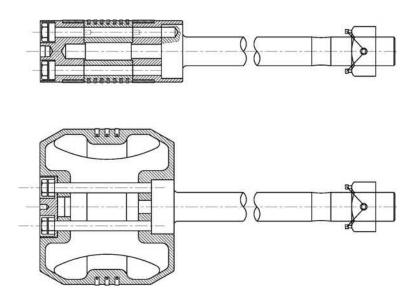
Pistons with multiple through-bolts. Courtesy of the Cooper Cameron Corporation.
